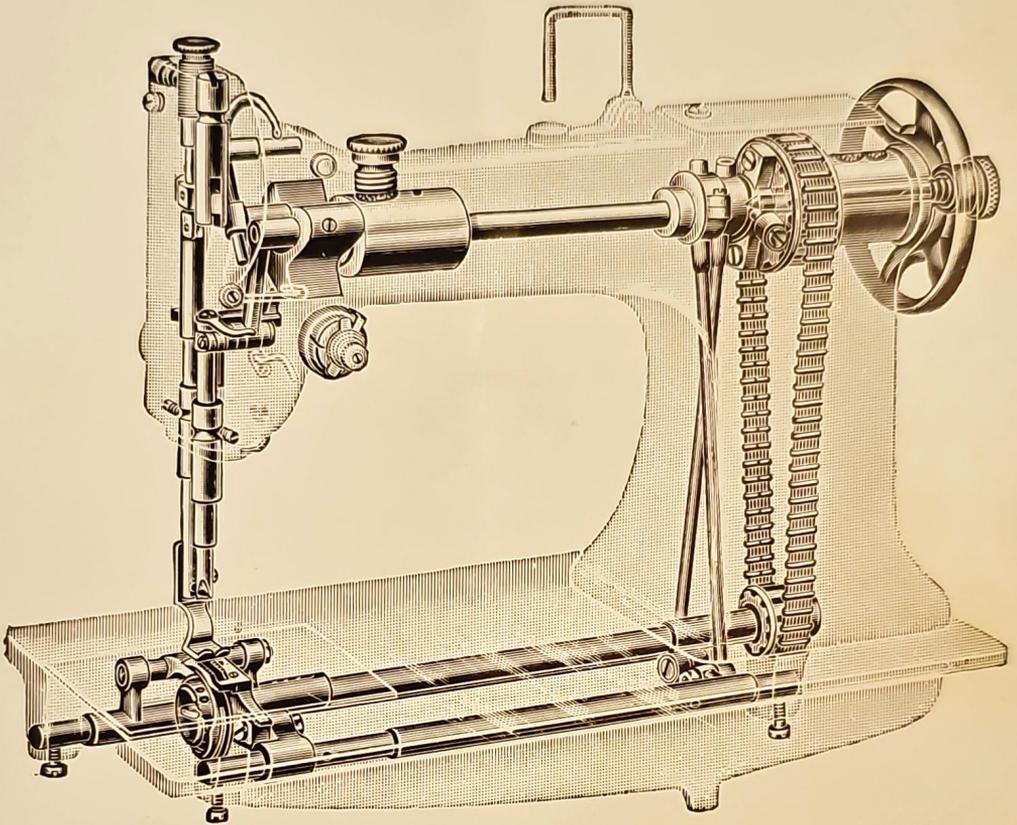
Machine 61 w 52. Phantom view showing the interior placement of the working parts in a finished machine.
